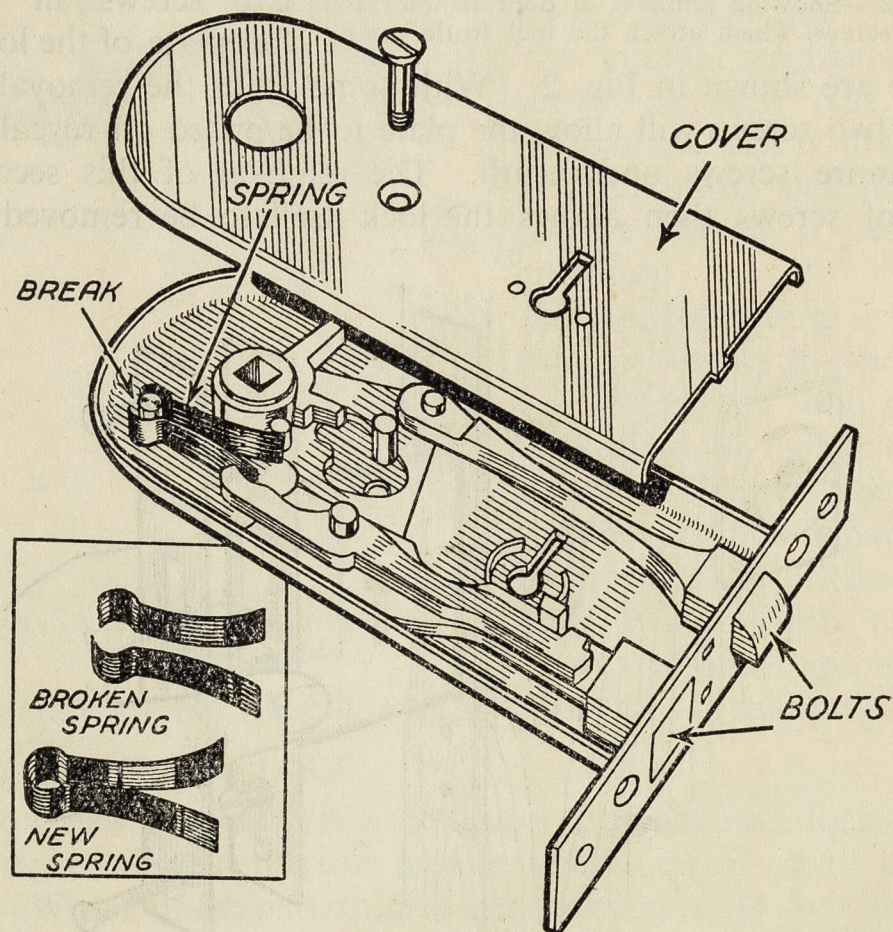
A typical mortise lock with the cover removed showing the broken spring
